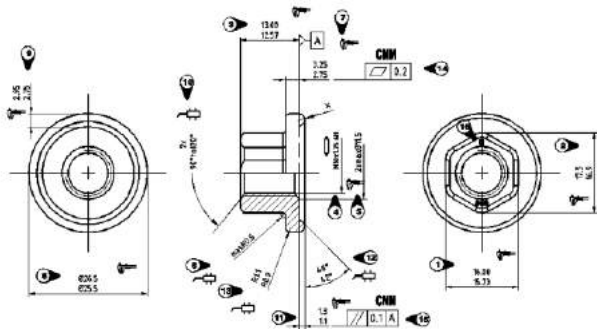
Technical drawing of the M10x1.25 welding flange nut.
